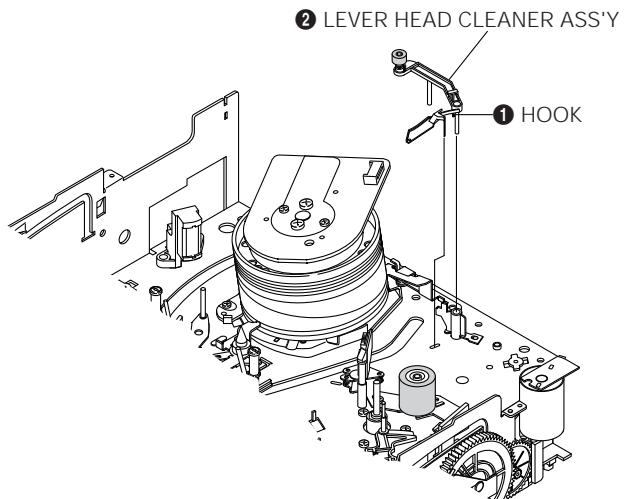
Lever Head Cleaner Ass'y Removal
